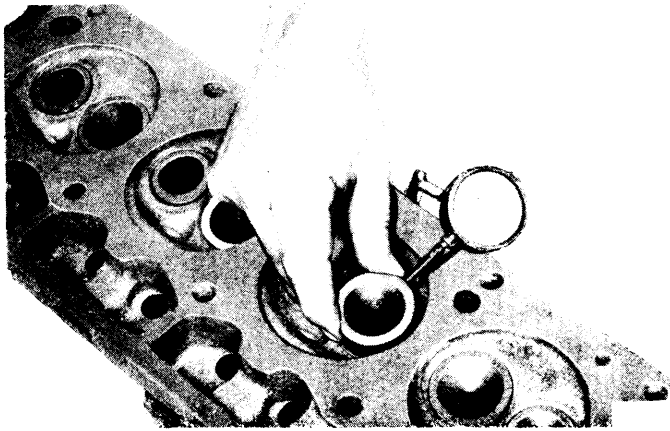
Using Dial Indicator to Measure Valve Stem-to-Guide Clearance
